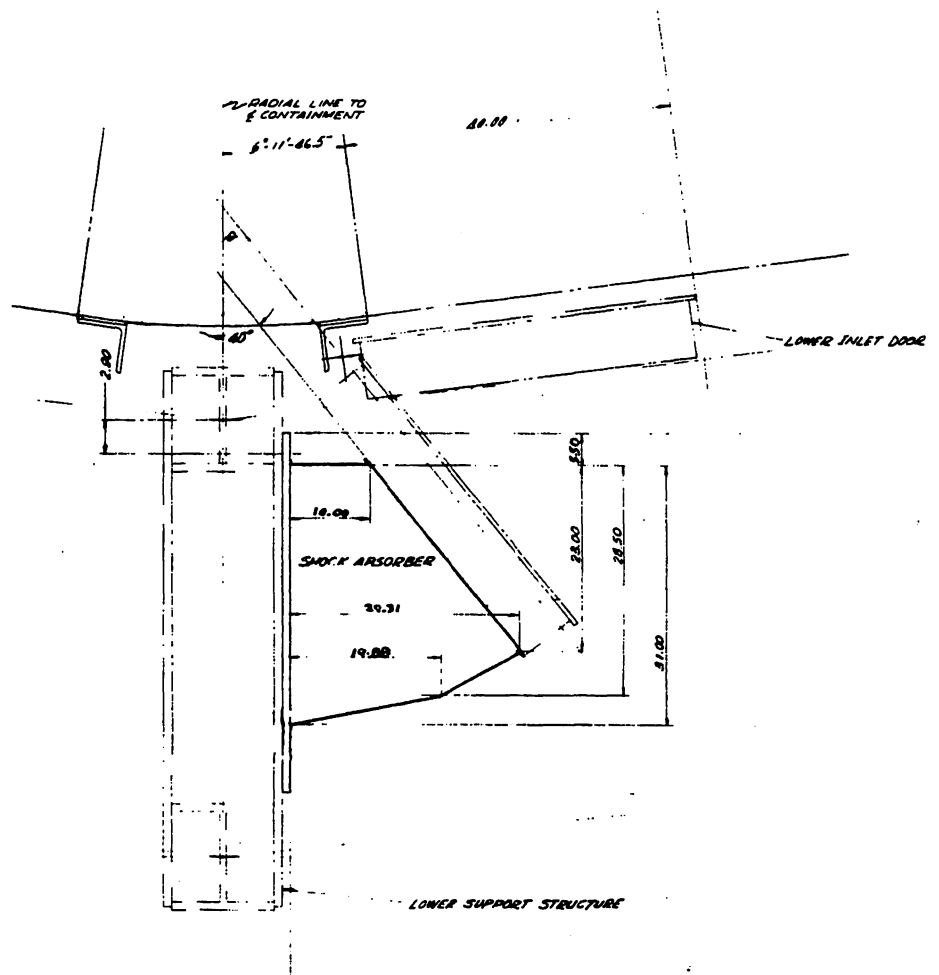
Lower Inlet Door Shock Absorber Assembly
